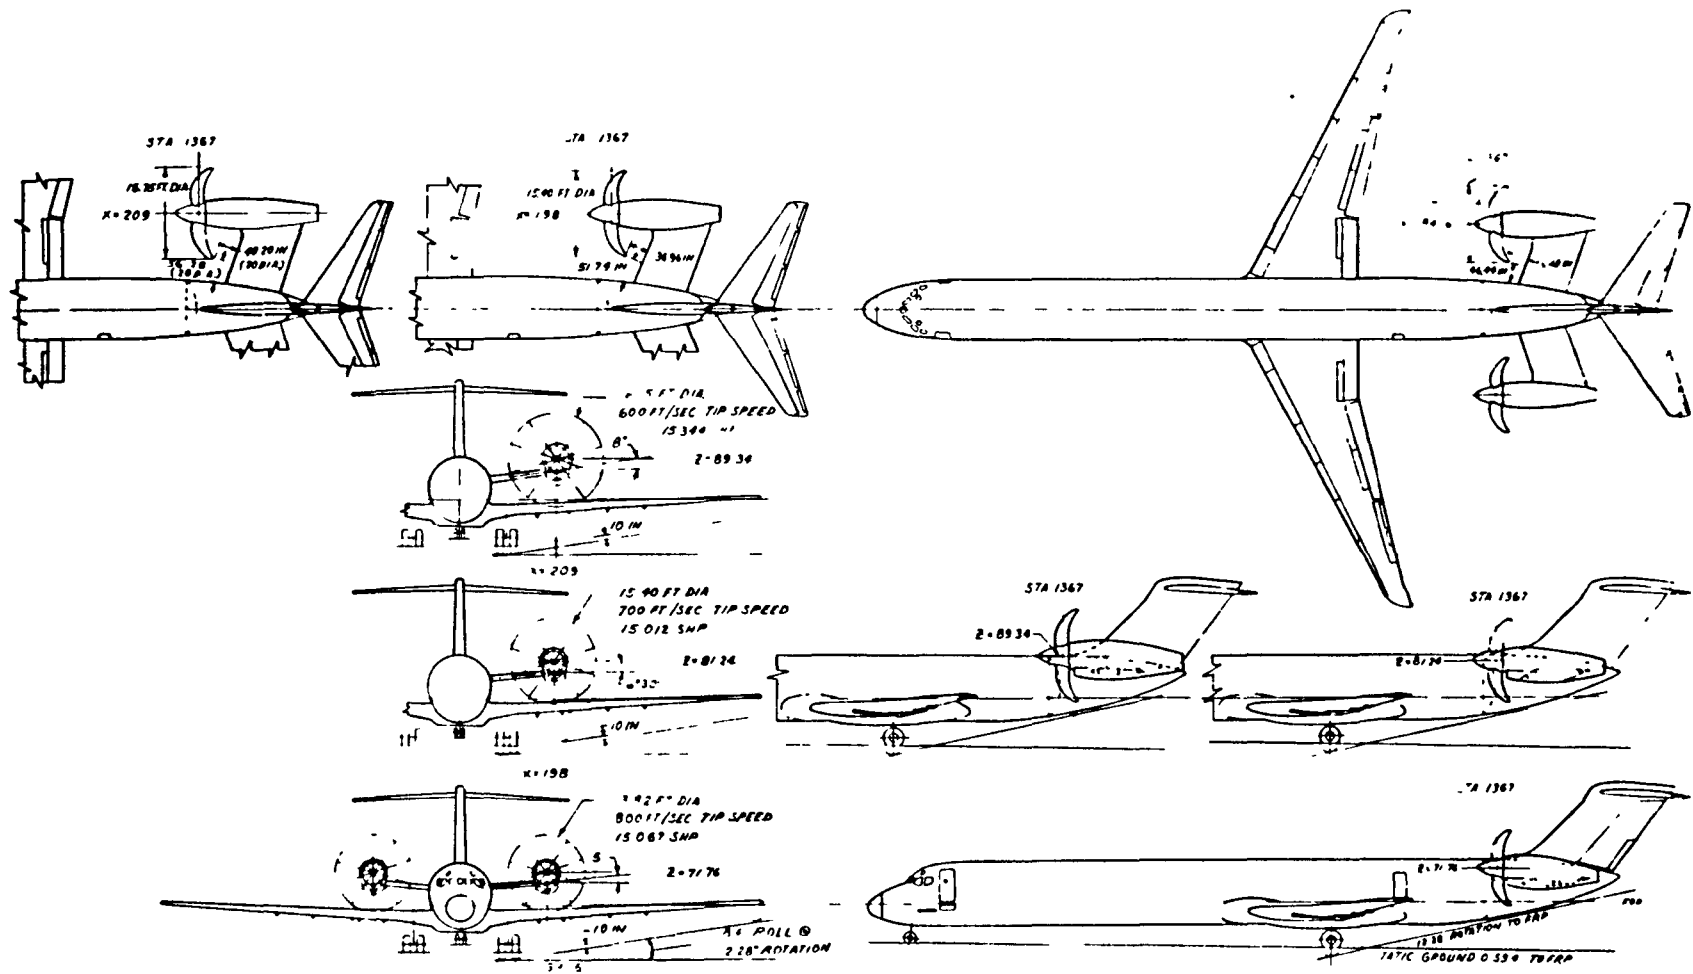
PYLON AFT MOUNT PROPFAN INSTALLATION
